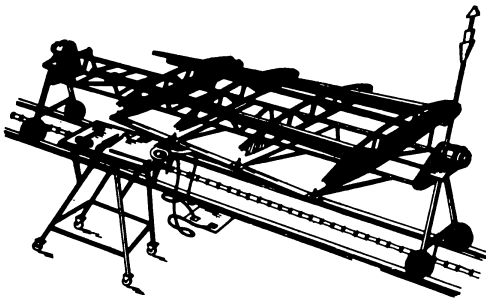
Jig-Dolly of Floor Belt on Wing Assembly Line
